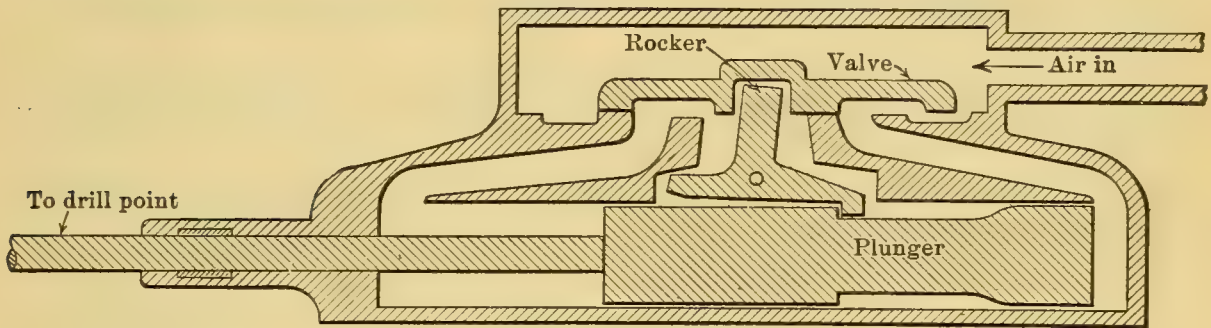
SECTION OF HEAD OF COMPRESSED-AIR DRILL.
